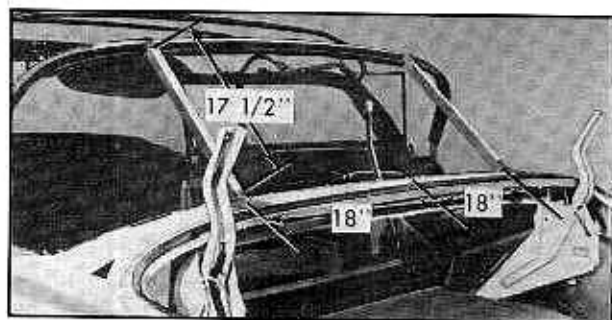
Installing Spacer Sticks on Rear Roof Bow
